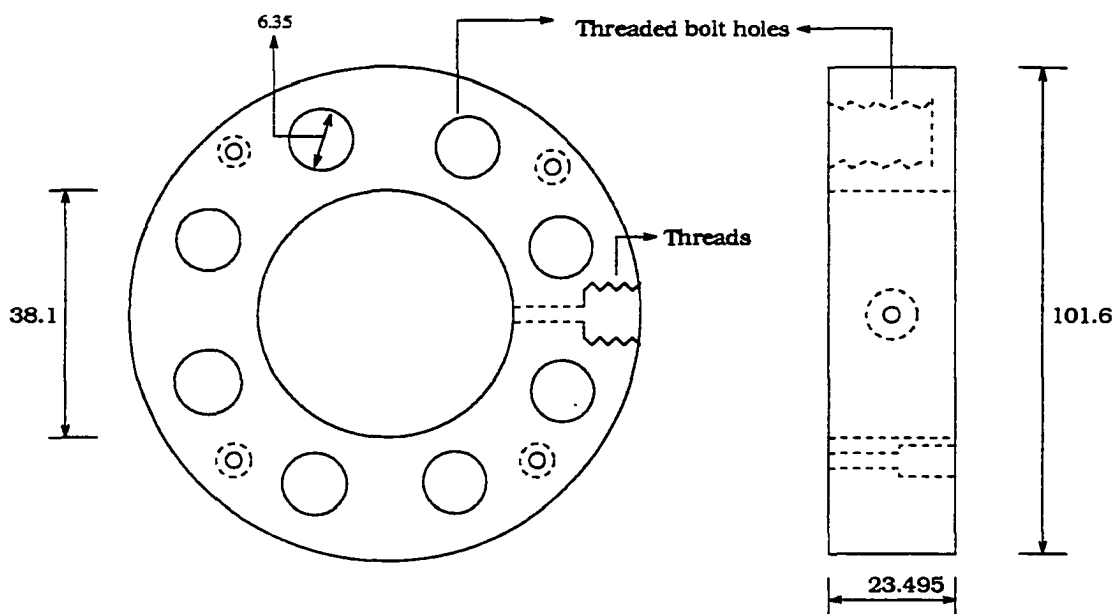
Speaker cover was made of aluminium and had the connection shown for the pressure equalizer. Dimensions are in mm.
